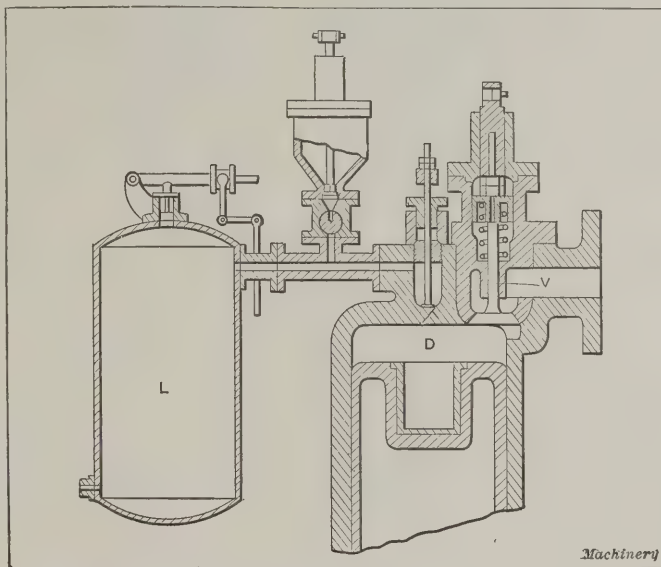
Section of Diesel Engine having Compressed Air Tank for Starting
